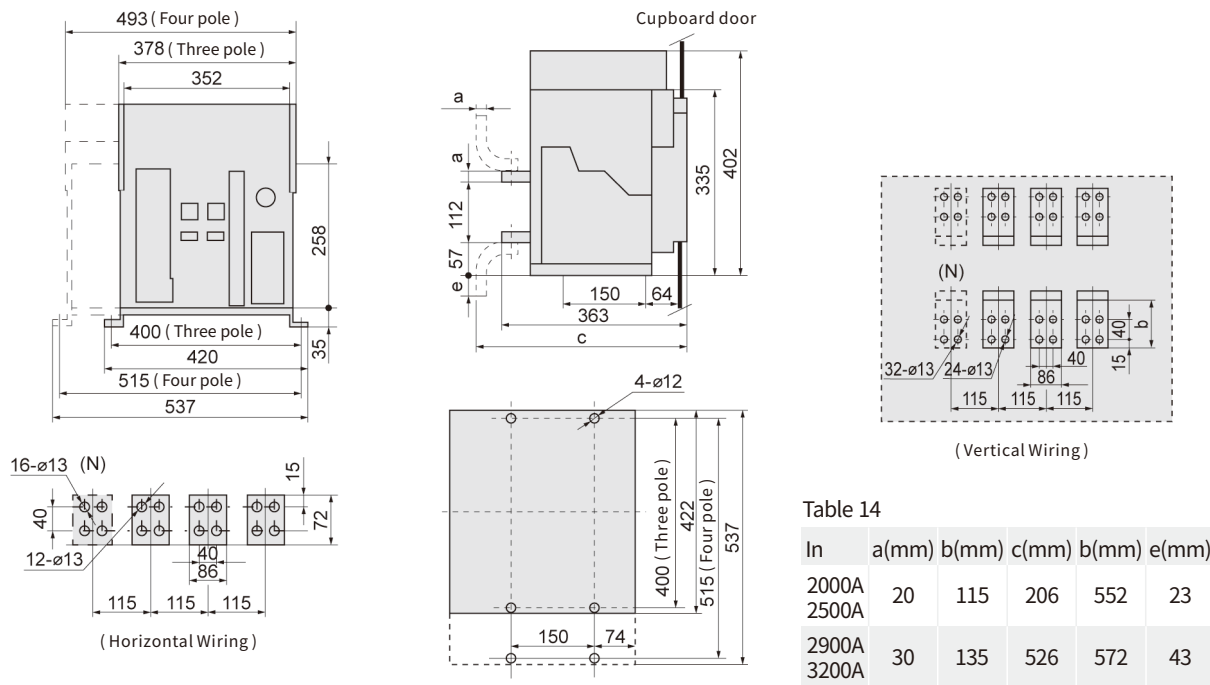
Outline and installation dimensions of fixed type circuit breakers (EKA1-3200, 3200/4)
